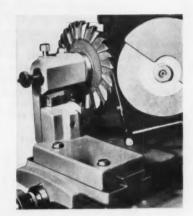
Close-up of cutter-grinding set-up on machine in Fig. 1
